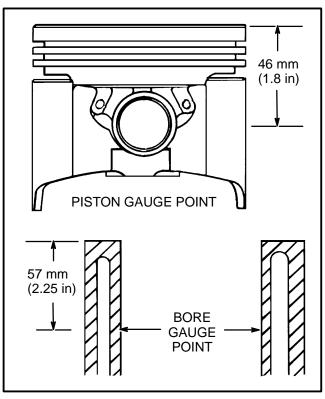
GAUGE POINTS FOR PISTON AND CYLINDER BORE
